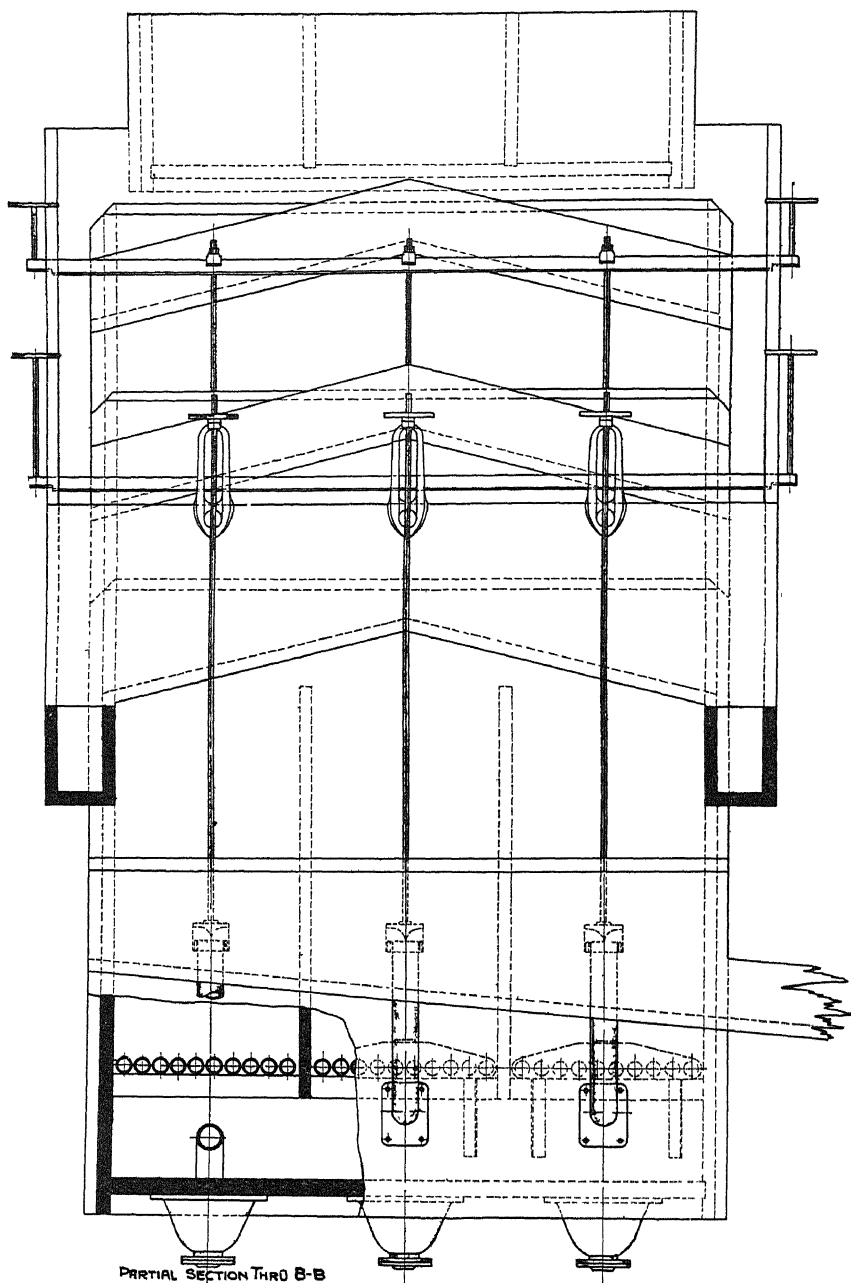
FRONT ELEVATION OF C-B FLOTATION MACHINE.
